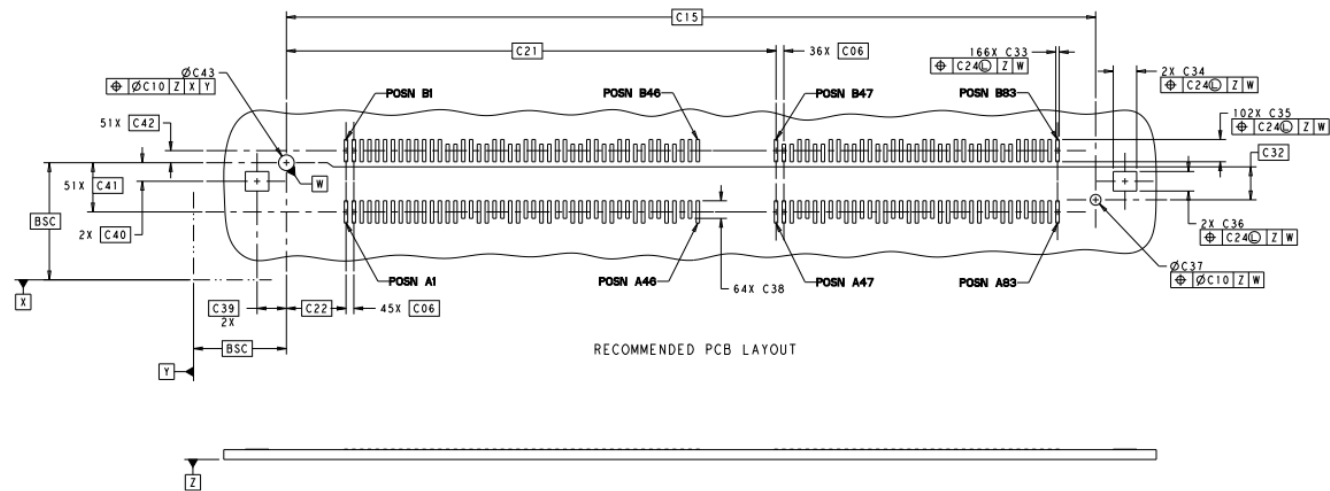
FIXED (RECEPTACLE) X16 CONNECTOR BOARD LAYOUT
